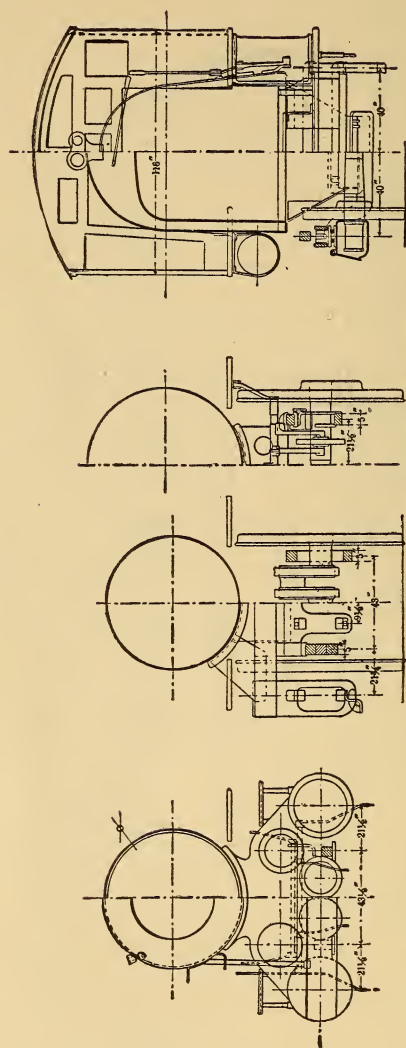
REAR VIEW AND CROSS SECTIONS
